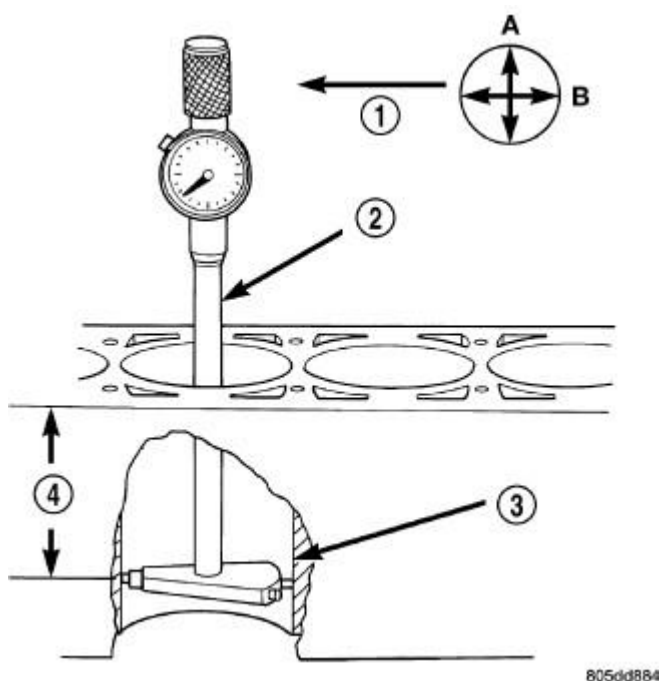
Measuring Inside Diameter Of Cylinder Bore Using Dial Bore Gauge
